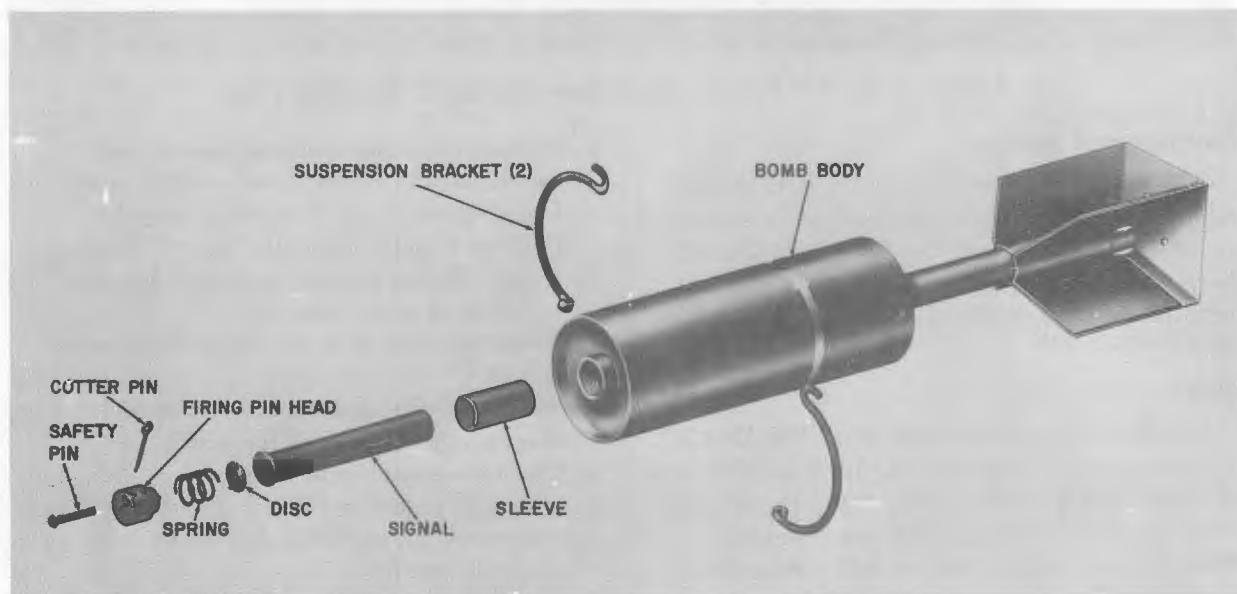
5-lb Practice Bomb Mark 106 Mod 3, Exploded View.
